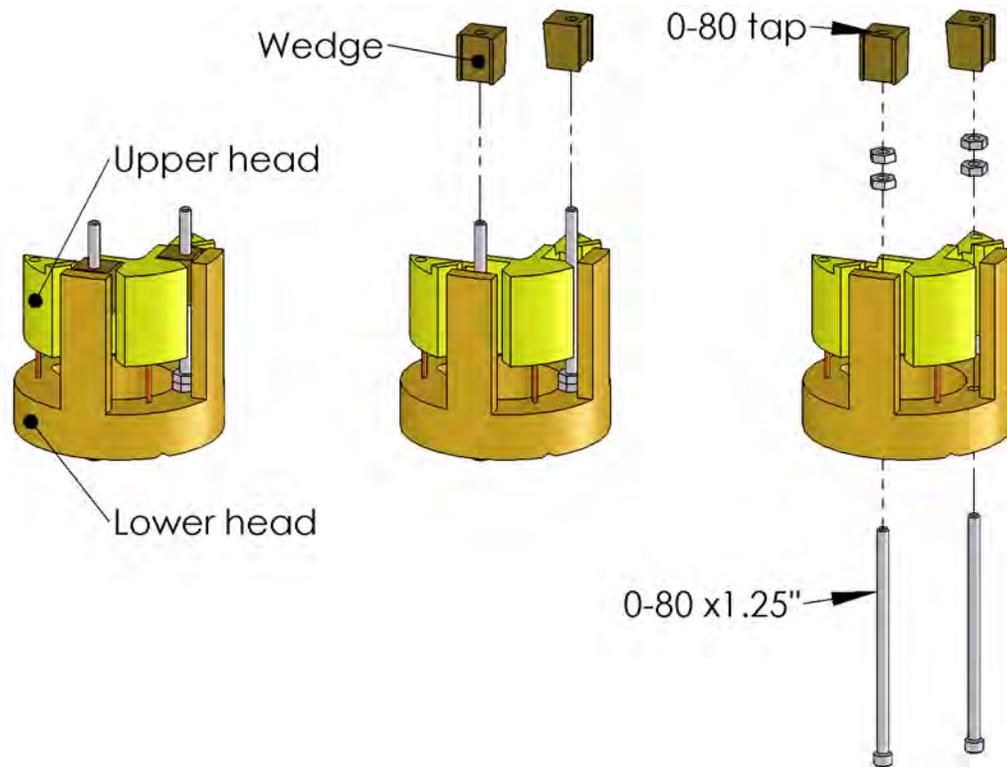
Isometric projections demonstrating the incorporation of the coarse positioning wedges into the head. (left) Head with installed wedges. (center) Exploded view illustrating installation of wedges. (right) Exploded view showing two 0-80 \times 1.25" screws that hold the wedges in place and drive them along the length of the head. These two screws fit through an untapped through-hole in the head and thus can freely rotate. They are held in place with two 0.12" 0-80 nuts tightened against each other.
